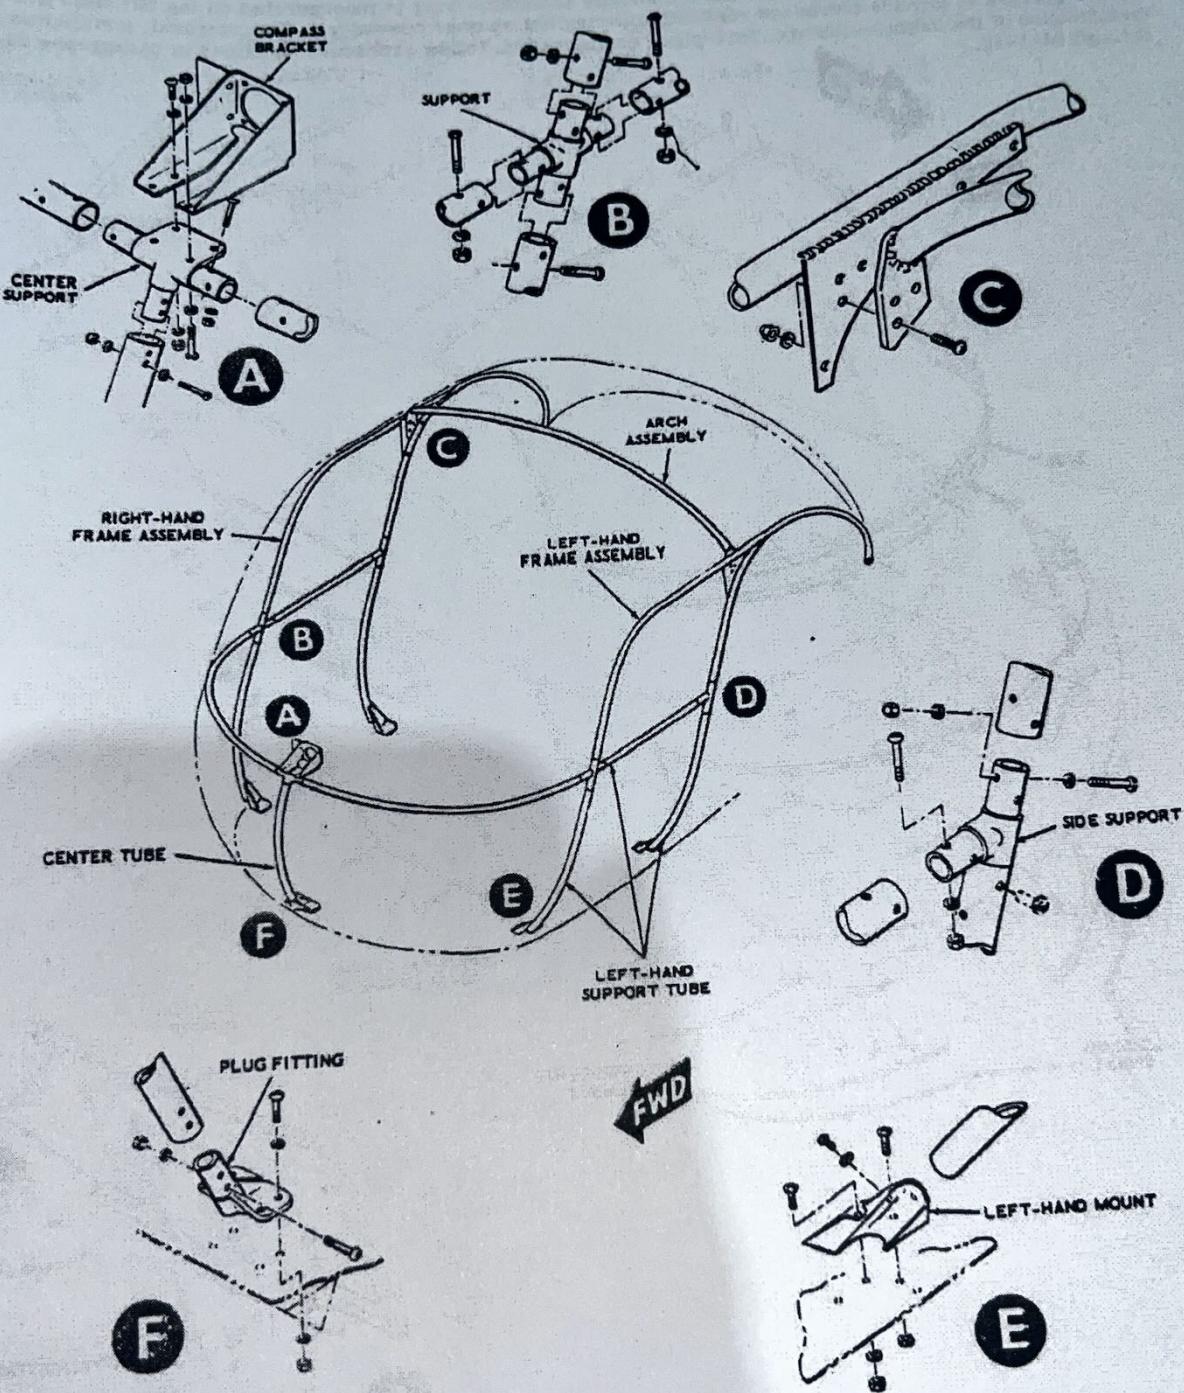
Cabin Support Tube Assembly, Four-Place Configuration
